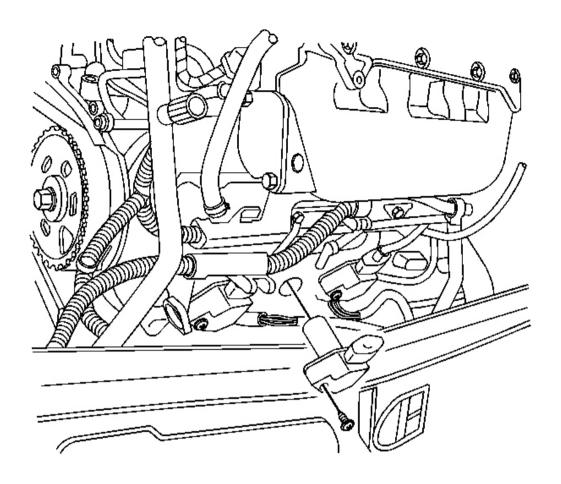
View Of Engine Coils Courtesy of GENERAL MOTORS CORP.
